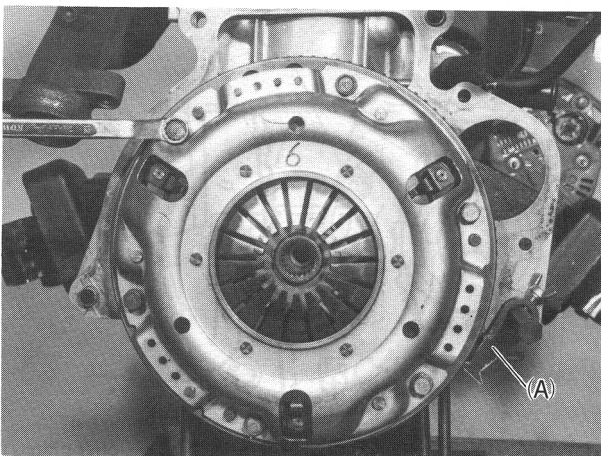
(A) Flywheel holder (Special tool 09924-17810)
